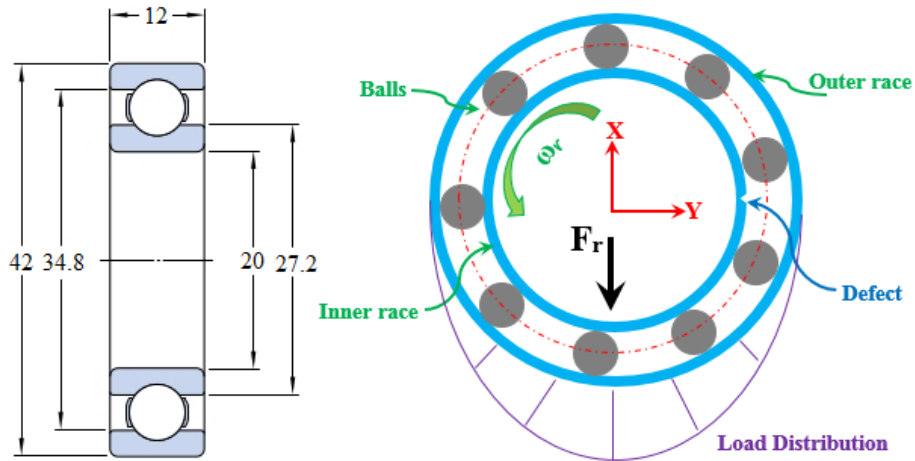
Geometry of the deep groove ball bearing SKF 6004.
